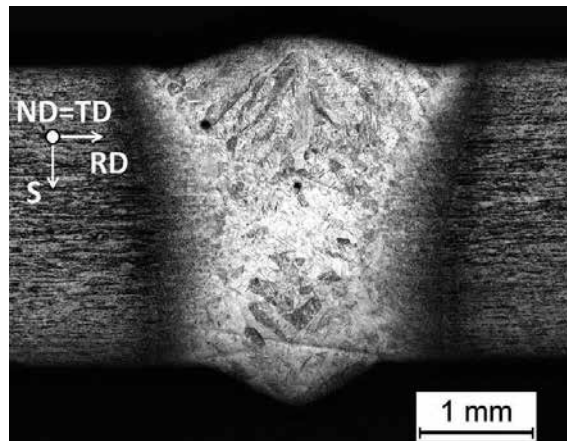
Transverse cross section macrograph of the laser beam welded Ti-6Al-4V butt joint.
